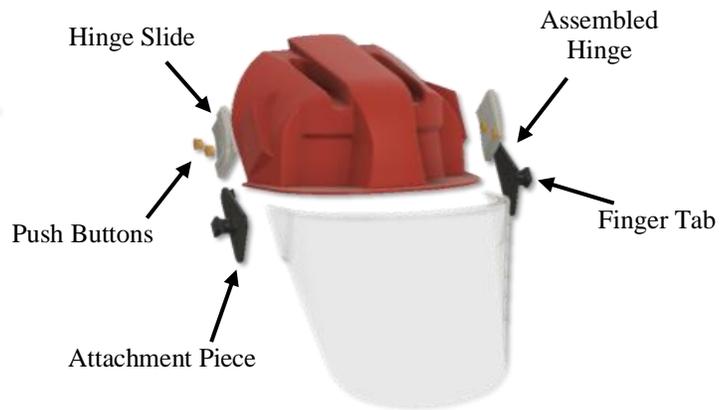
An exploded image of the Flip Shield with the hinge parts labelled.
